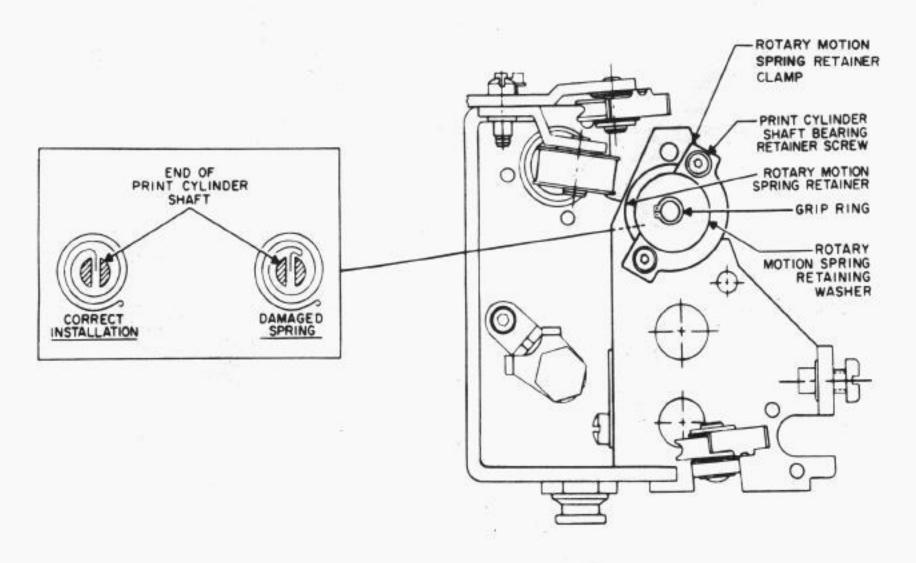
Rotary Cable Replacement, Left Side View of Printer
